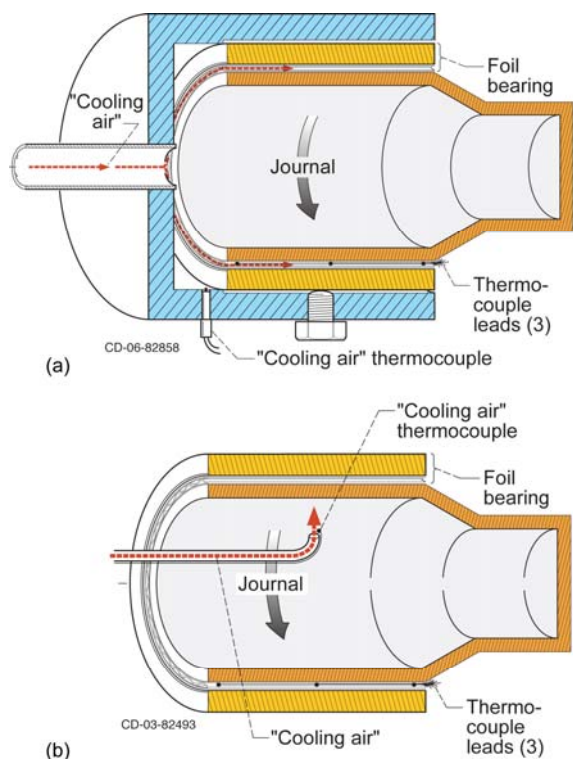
(a) Axial cooling method with bearing inside can. Air flow is through bearing support structure. (b) Direct cooling method with guide tube oriented towards journal ID surface.
